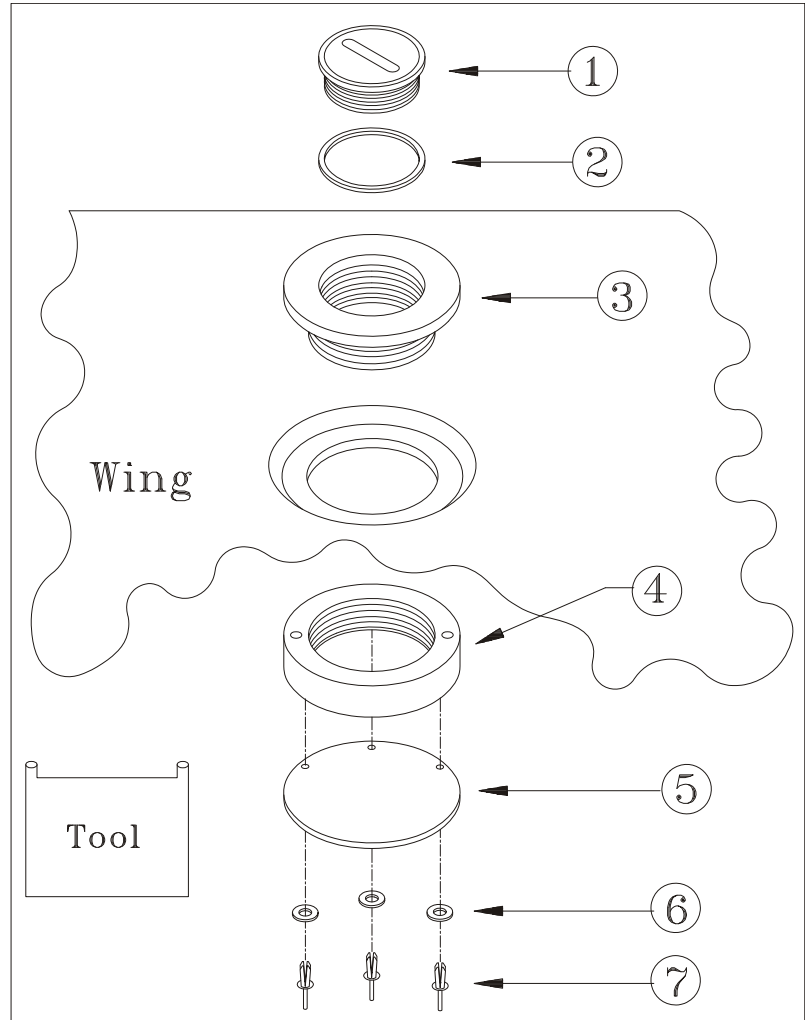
Filler Neck and Sealing Lip Removal/Installation
